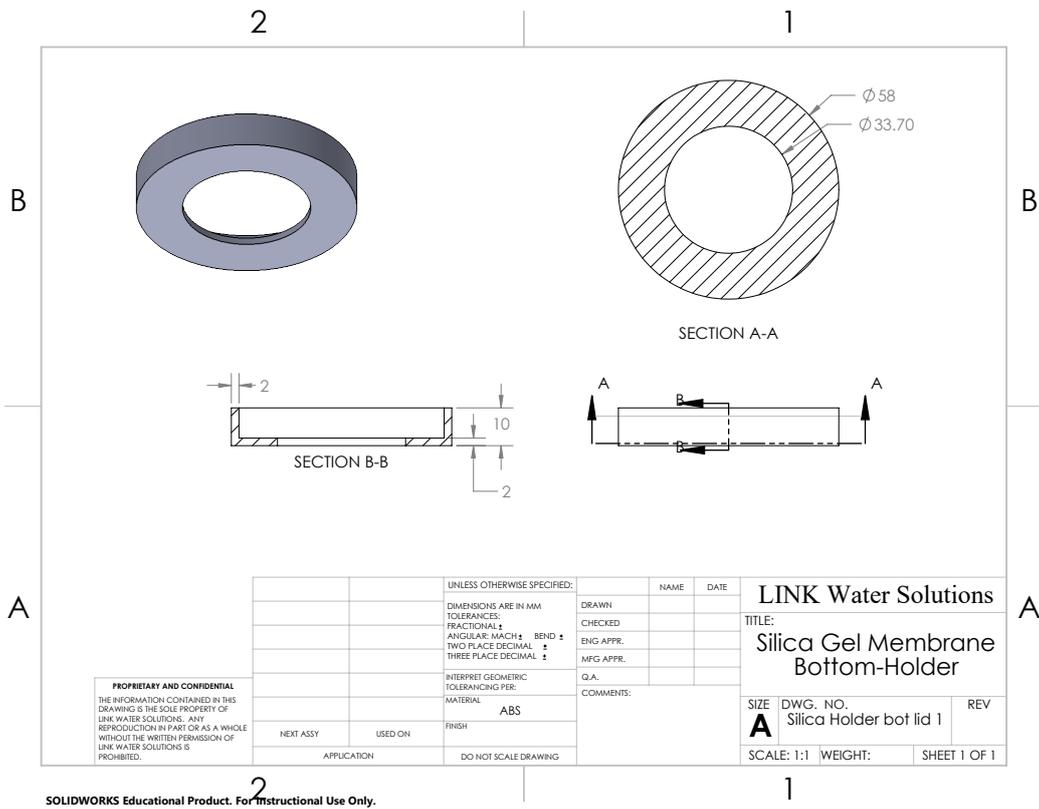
Technical drawing of the bottom lid of membrane holder of the silica gel holder
